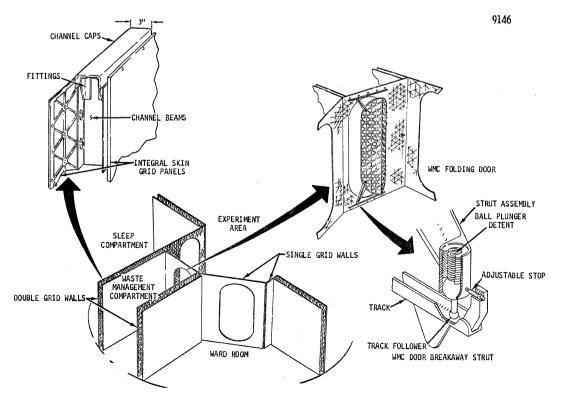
Crew Quarters Wall Arrangement
